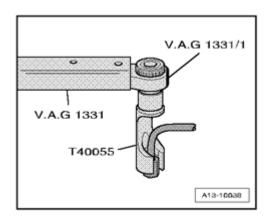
Fastening High-Pressure Line At Fuel Rail Using Torque Wrench V.A.G 1331 With Open End Wrench Socket V.A.G 1331/2
